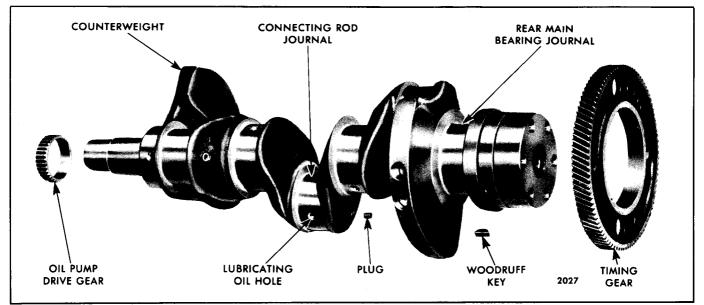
Crankshaft Details and Relative Location of Parts (3-53 Crankshaft Shown)
